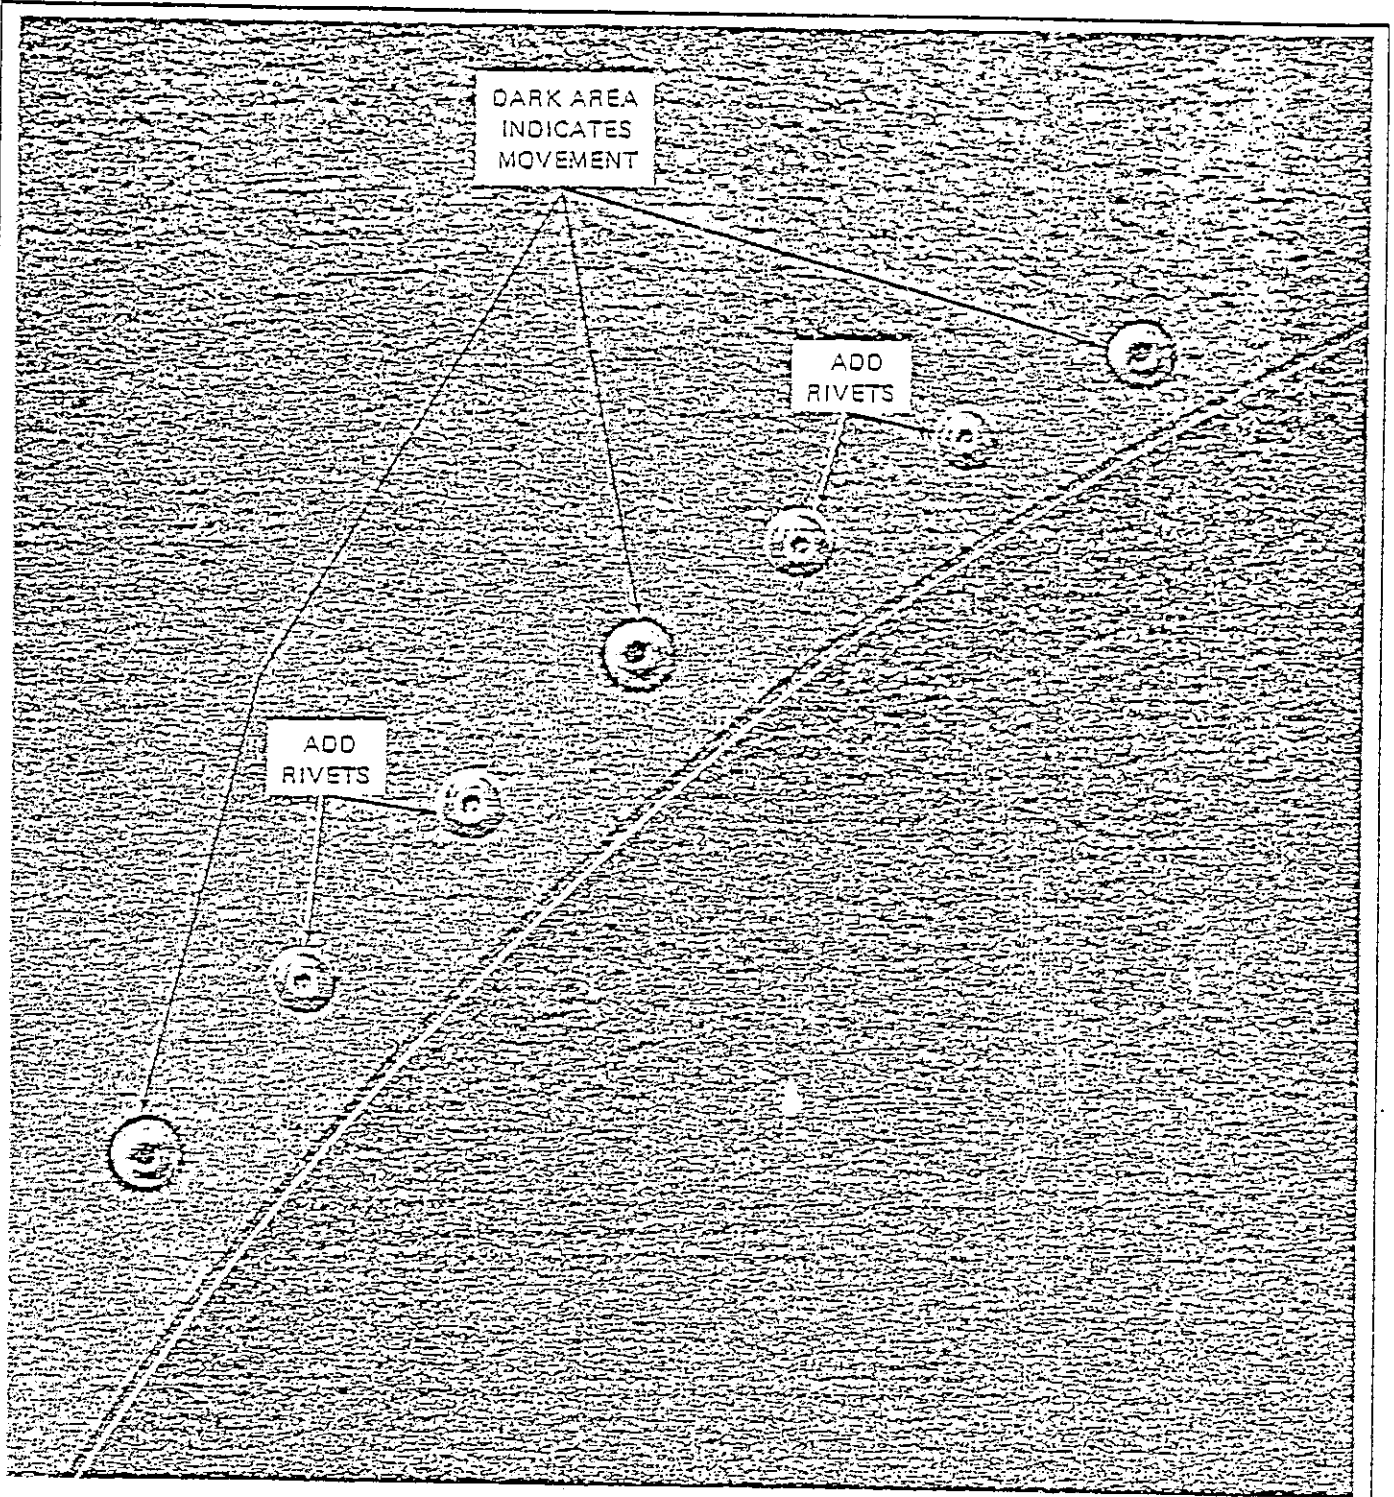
SHEAR PANEL TO WHEEL WELL CONNECTION.
